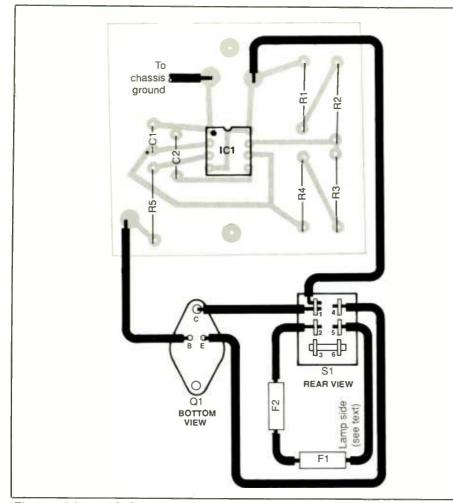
Wiring guide for pc board. The switch, transistor and fuse holders mount off the board and that F1 is actually the headlight fuse holder in your motorcycle's electrical system.
